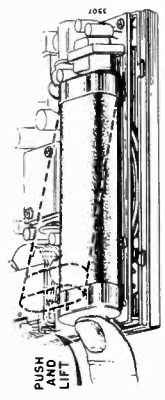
View Showing Method of Removing Battery Holder from Chassis Board.
